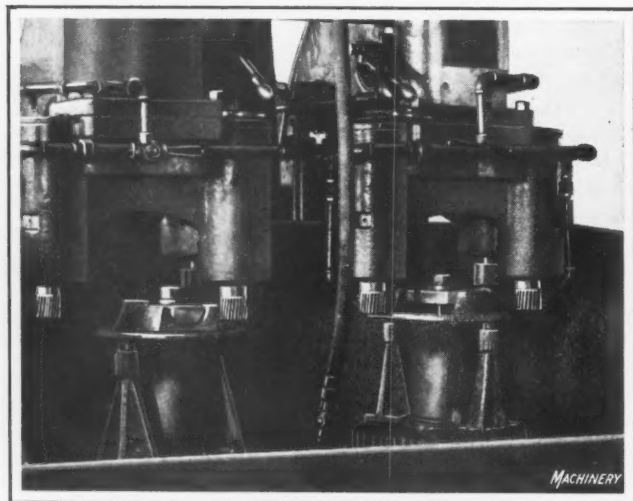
Set-up of One Unit for end-milling the Flange and Four Bosses
